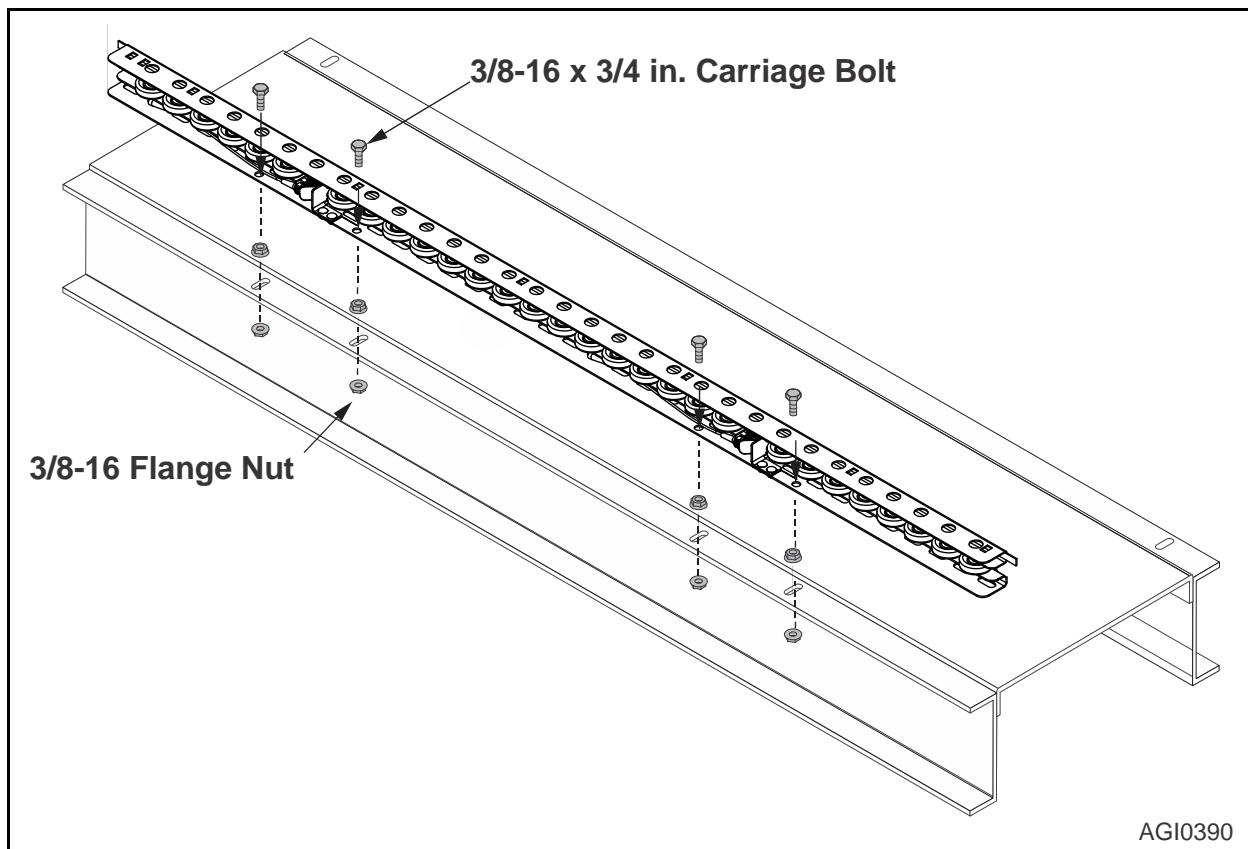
78 Direct-Mounting Skate Wheel Side Guides
